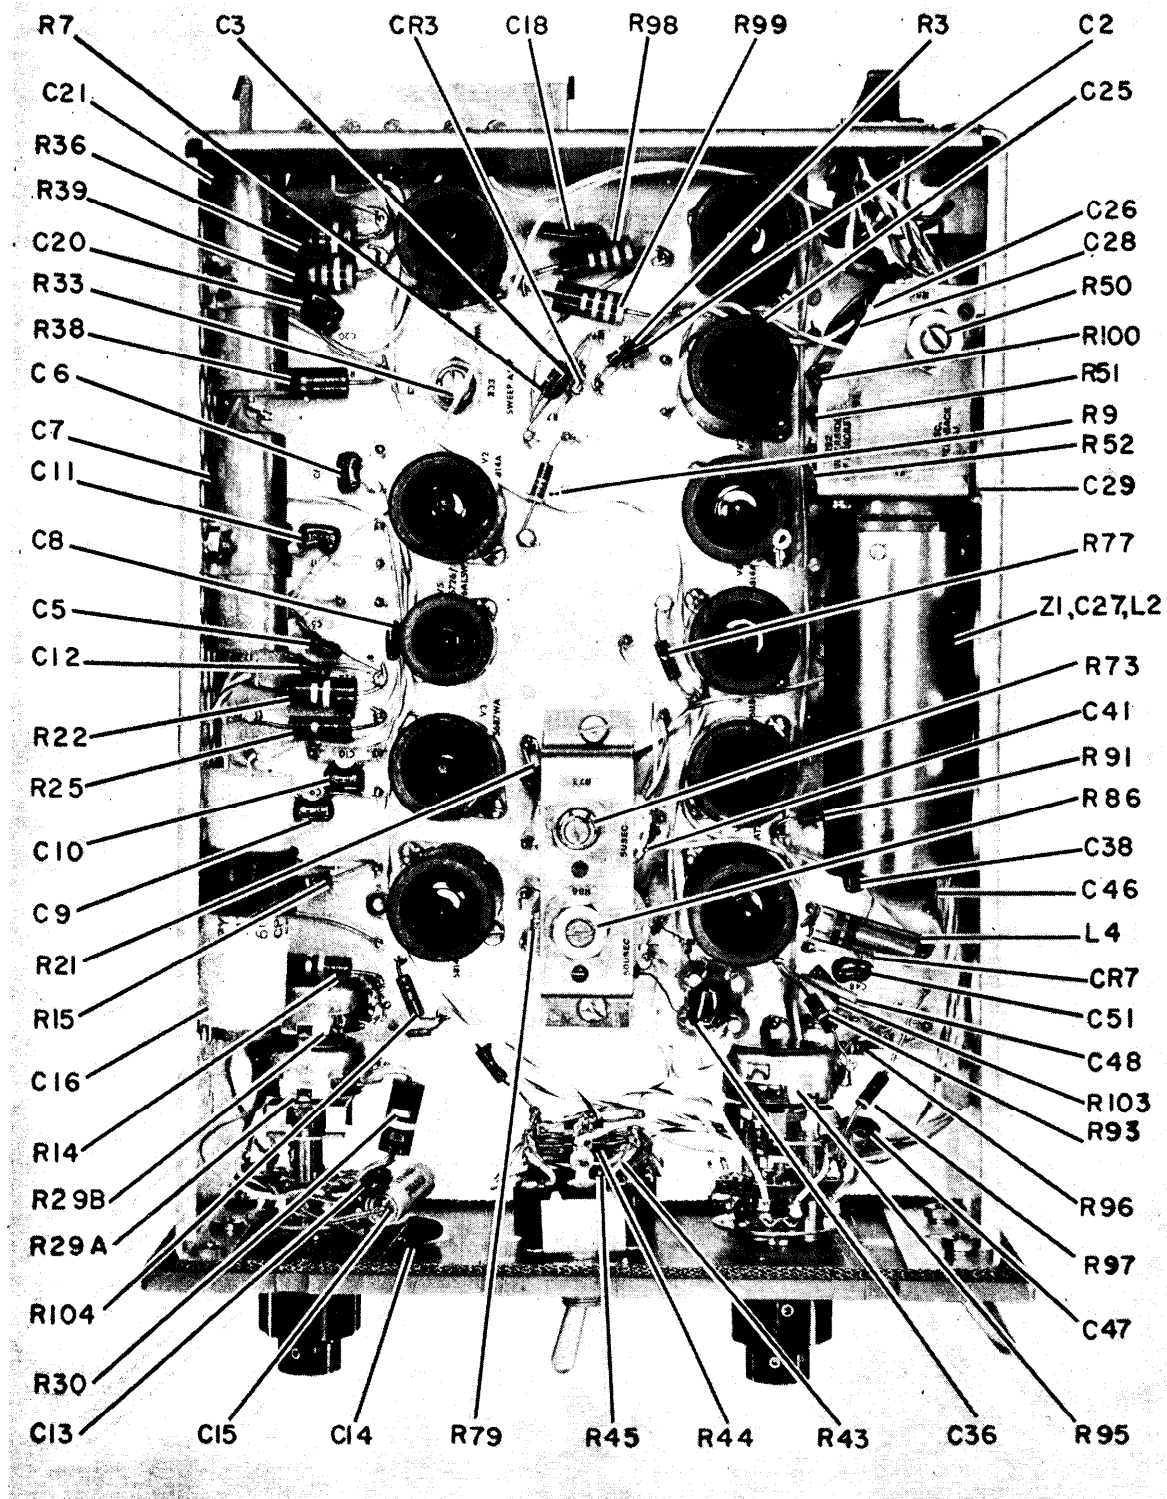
Display Unit, Video Attenuator Assembly, Parts Location
